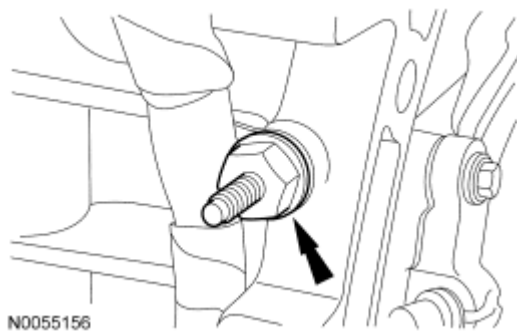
Identifying Wiring Harness Retainer Stud Bolt
